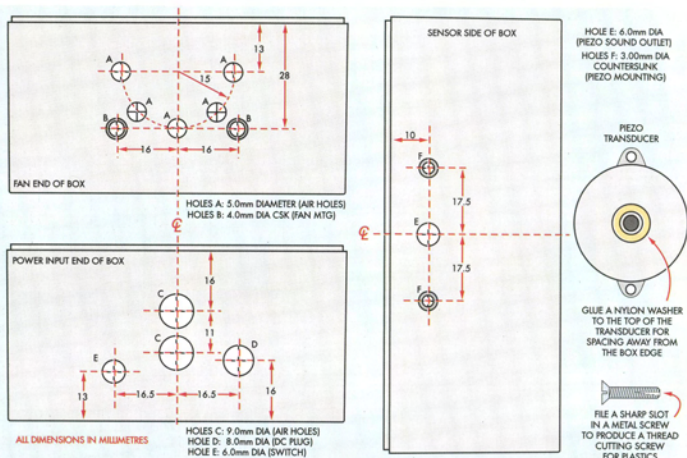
these diagrams can be copied and used directly as drilling templates for the plastic case (the larger holes are best made using a pilot drill and then enlarged to size using a tapered reamer). Also shown are the mounting details for the Nylon washer on the transducer plus the details on modifying a metal screw to so that it cuts a thread in plastic.
